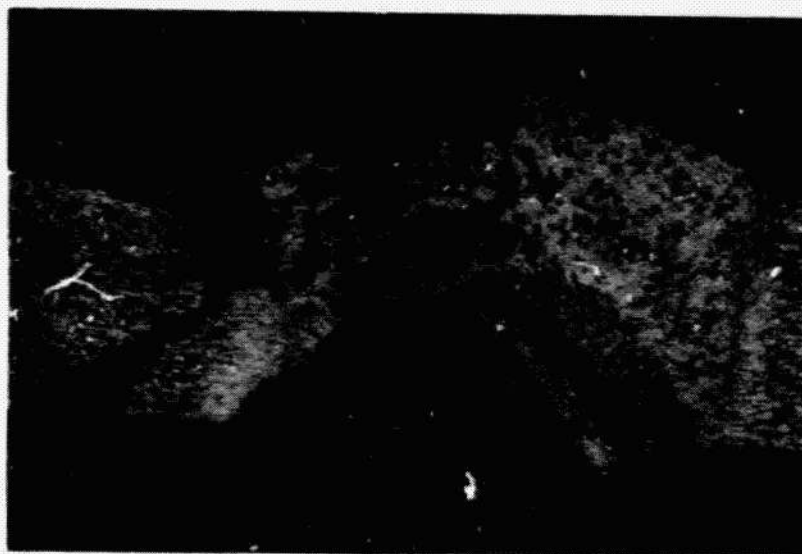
TIG weld fracture-no heat sink (x5).
